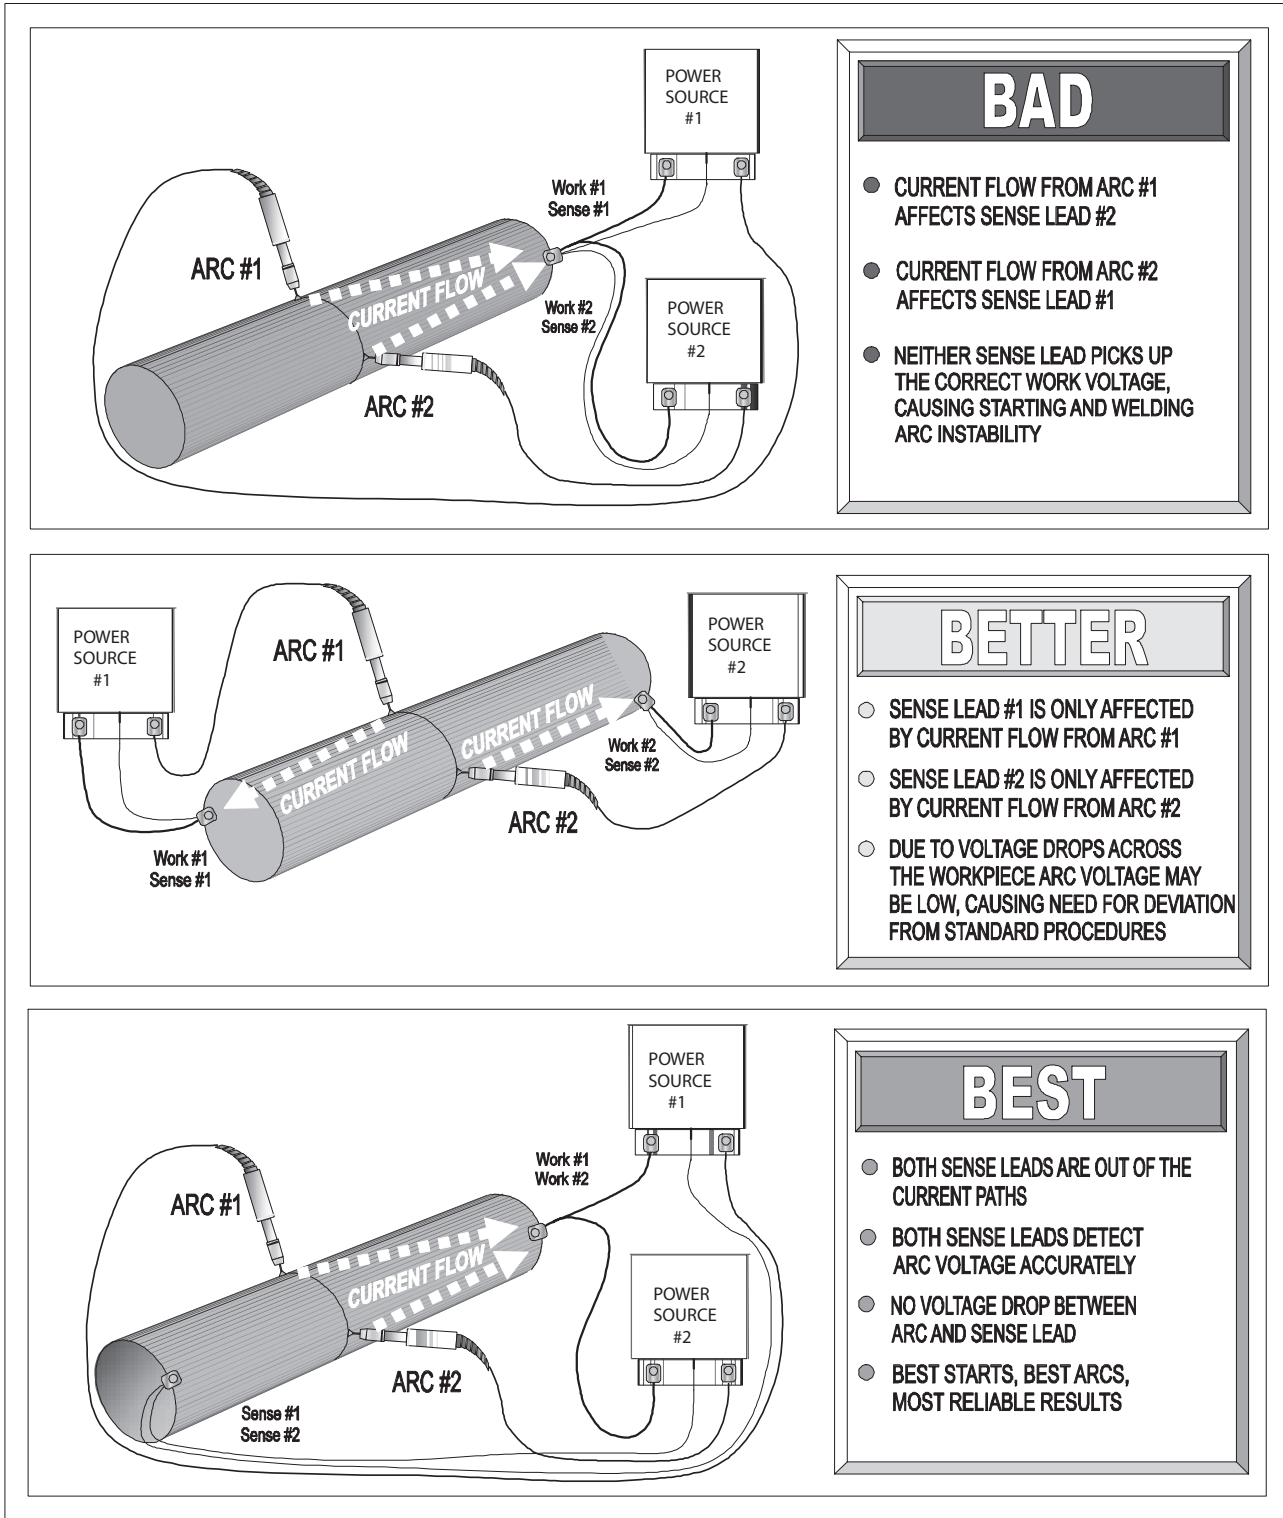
MULTI-ARC CIRCUMFERENTIAL WELDS
